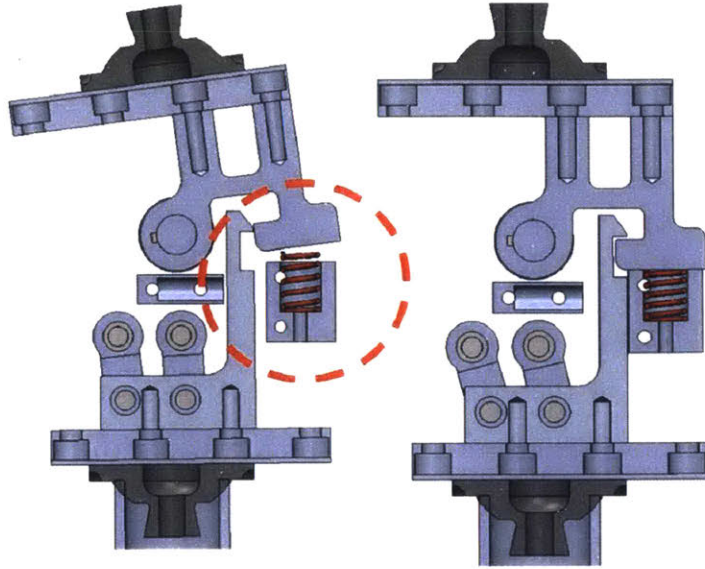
Power spring in the knee prototype assembly cross section. The power spring is a linear spring inside a hard stop attached to the knee body. It is compressed when the latch is locked.
